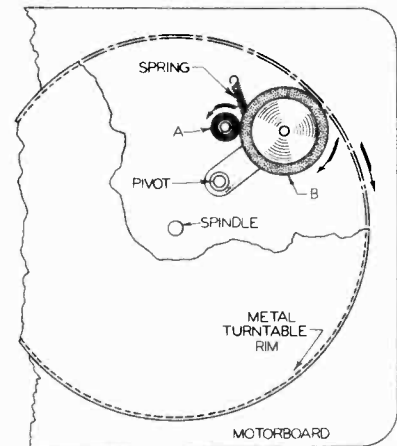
The rubber-tired wheel A is on the motor shaft and this drives the rubber-tired wheel B that in turn makes contact with the rim under the turntable and so drives it.
